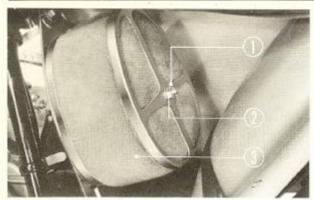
① Lock pin ② Lock nut ③ Air cleaner element
